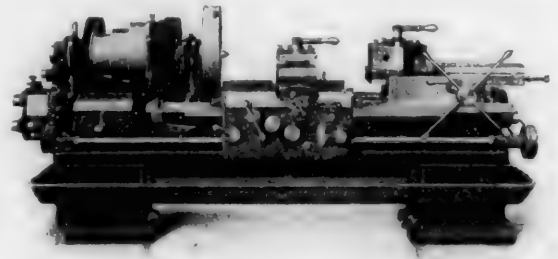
20-IN. LATHE WITH FRICTION HEAD AND TURRET.
